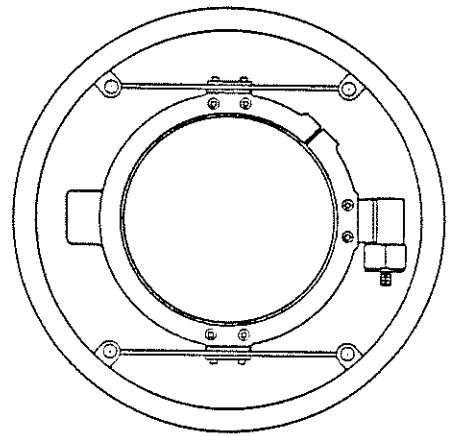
End view of force transducer station, showing beam springs, cylinder segment, and accelerometer.
